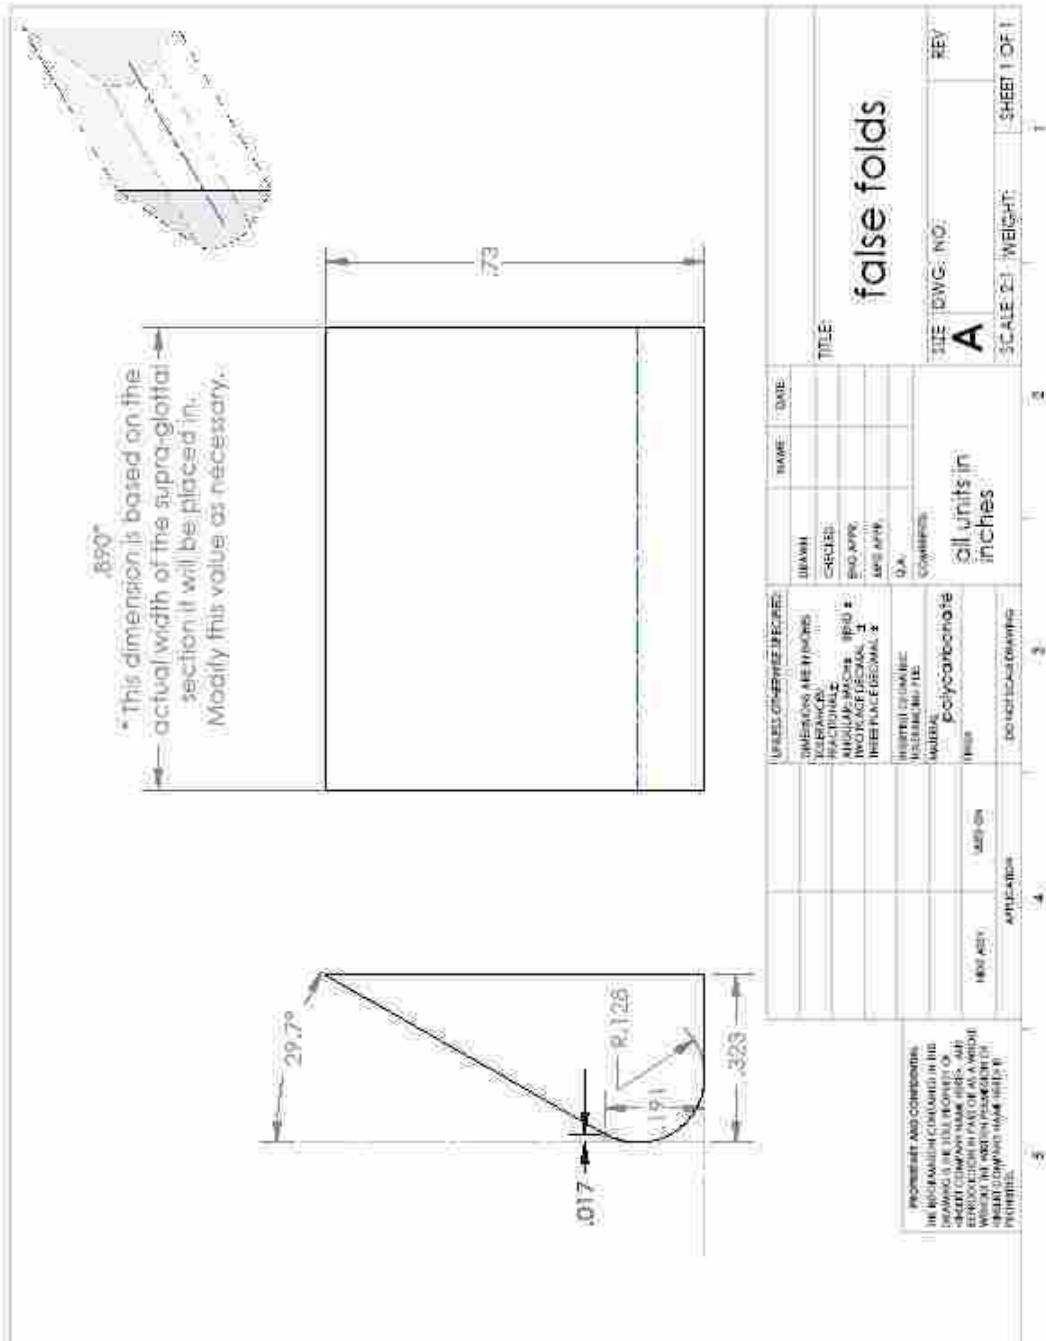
Drawing of false vocal fold model used in Chapter 4.
